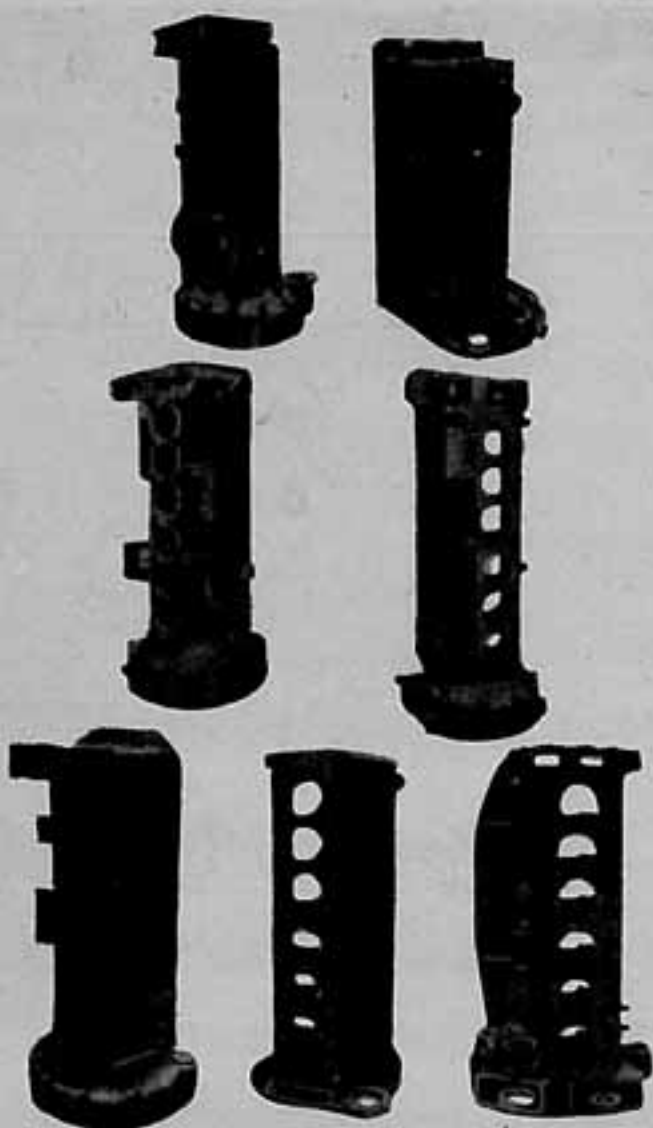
Typical 6-cylinder commercial vehicle crankcases, for petrol and oil engines, cast in Elektron magnesium alloy. The weight of the largest casting is 168 lbs.; a similar casting in aluminium alloy would be 284 lbs.
